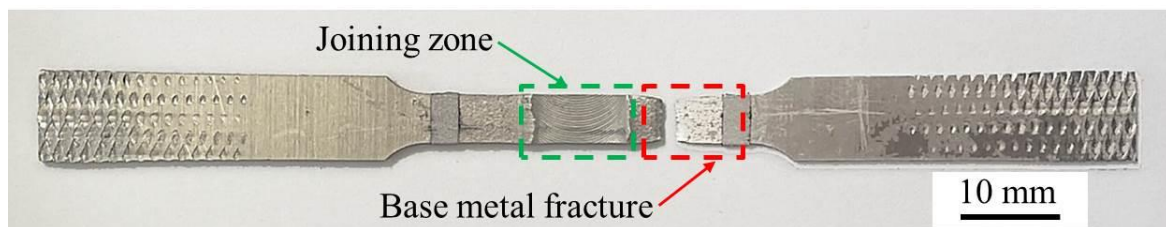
Fractured cross-weld FSW joint after tensile test
